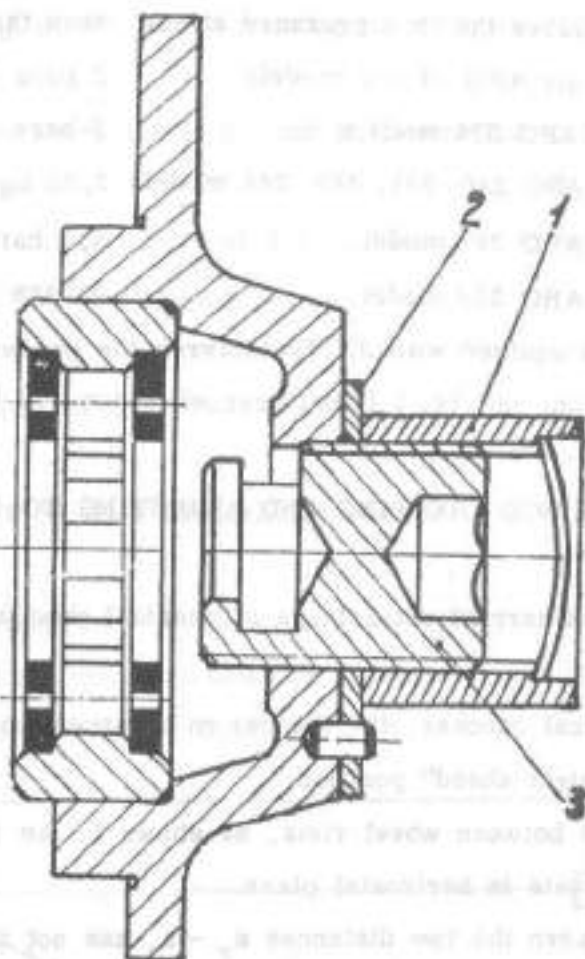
47. STEERING WHEEL ANGULAR PLAY ADJUSTING SYSTEM.
